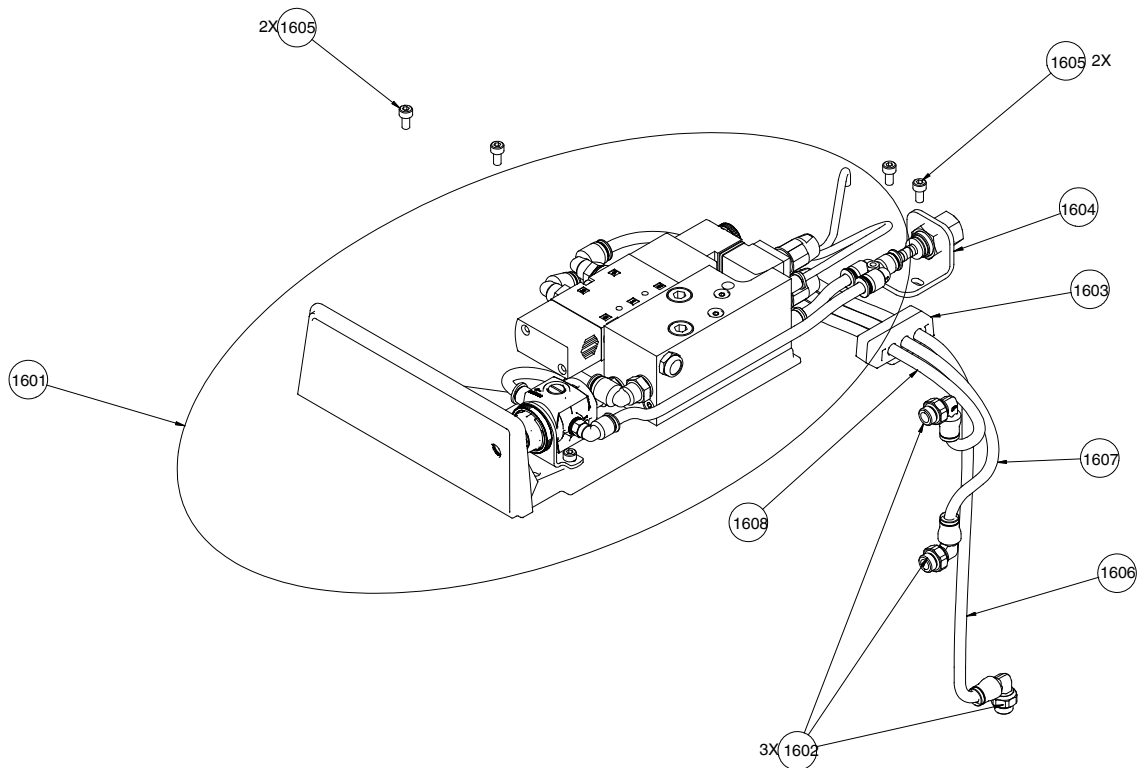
Standard single acting regulator module with transducer parts drawing
